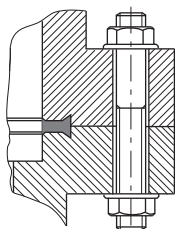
Flange connection CF-F, stud screw and tapped hole
